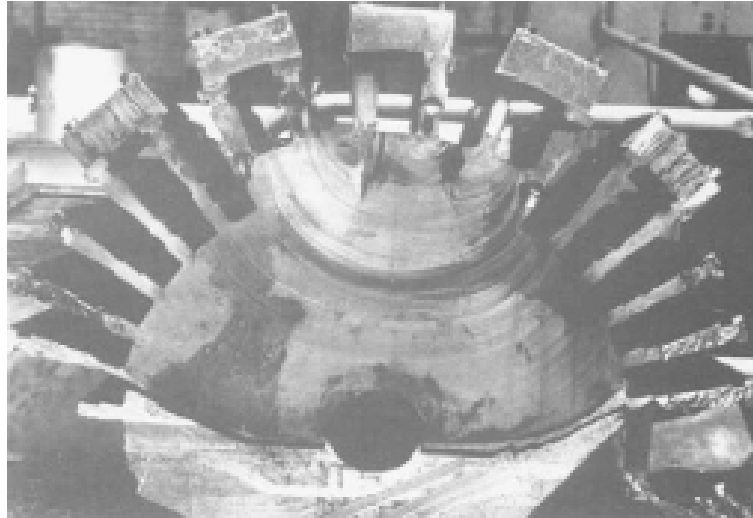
Fretting fatigue failure example of turbogenerator rotor (Lindley and Nix, 1991)
